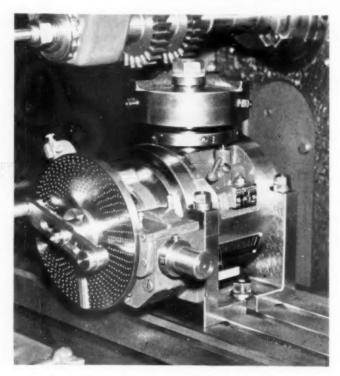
Universal milling machine dividing head with a chuck mounted on the spindle for milling the sides of a large hexagon nut.
